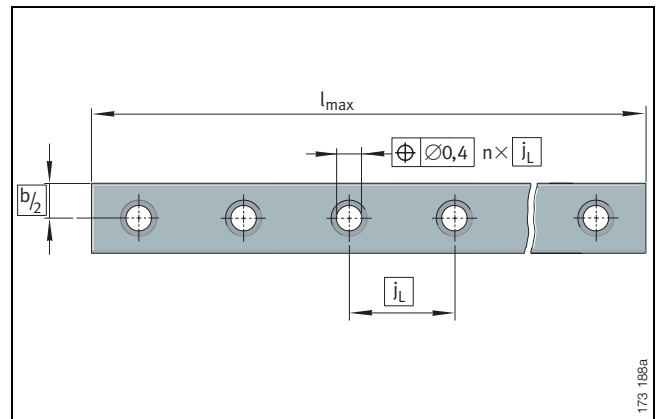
· Positional and length tolerances of guideways – hole pattern to ISO 1101
